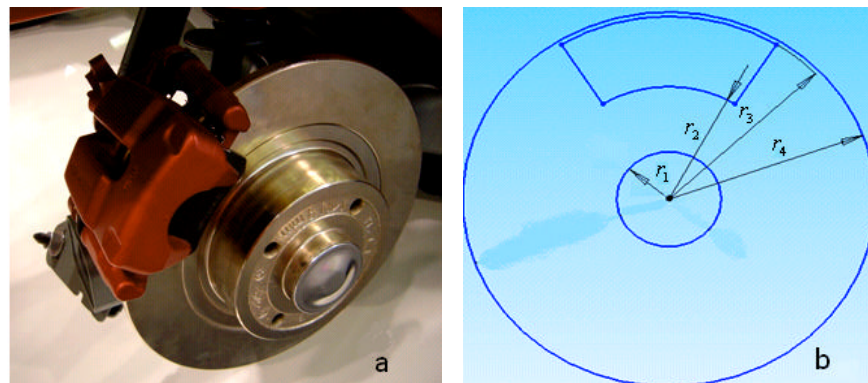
(a) Disk brake system and caliper assembly and (b) schematic shape of the disk and the pad in sliding contact
